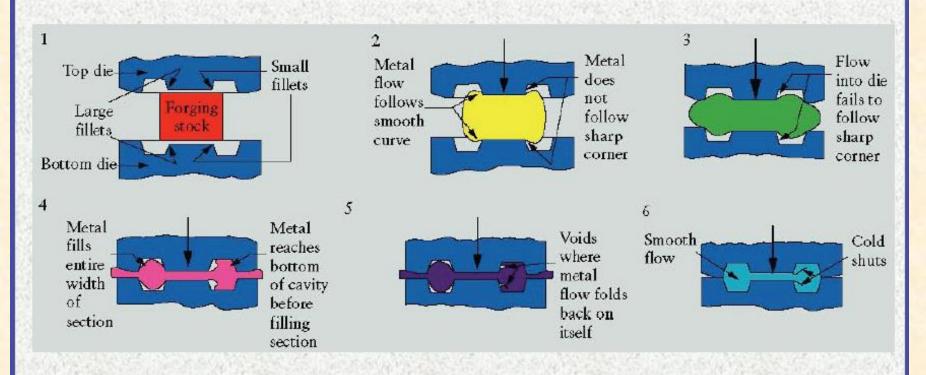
Effect of fillet radius on defect formation in forging. Small fillets (right side of drawings) cause the defects. *Source*: Aluminum Company of America.
